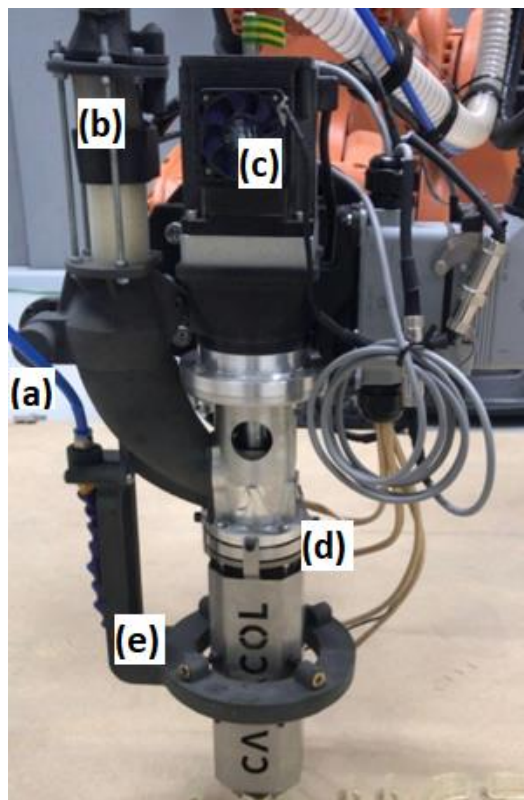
Extruder head from Caracol: (a) Vibratory motor; (b) Pellets feed; (c) Motor; (d) Water cooling ring; (e) Cooling air.
